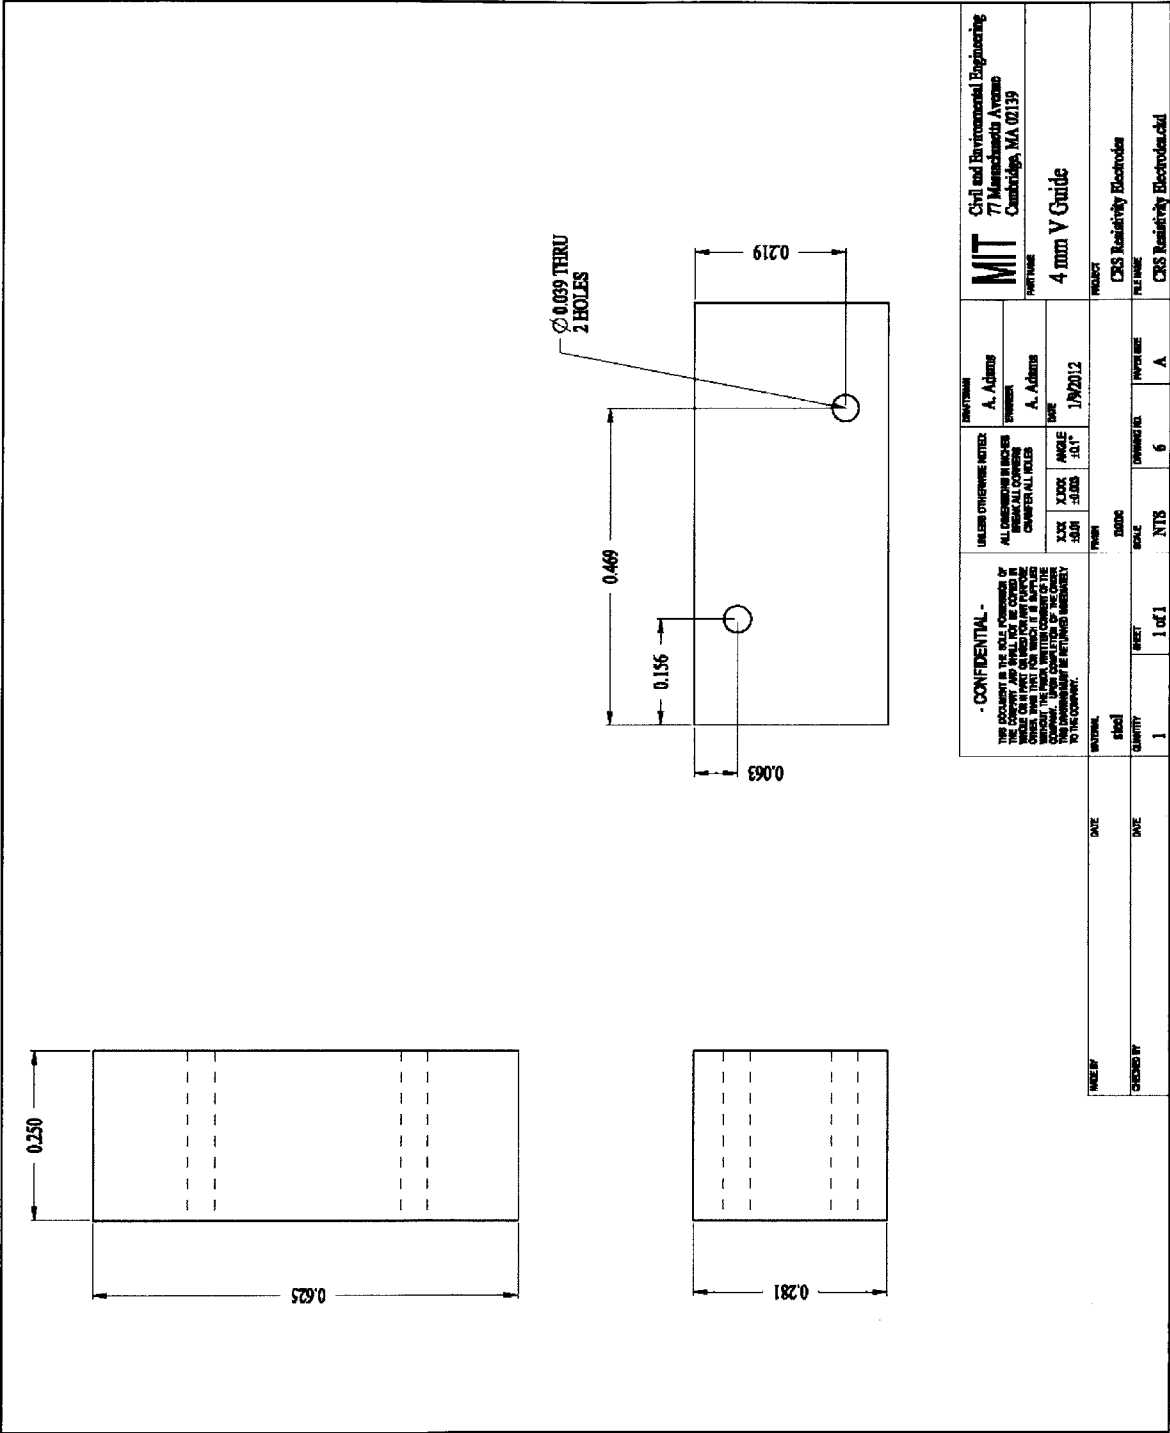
CRS Electrodes: Drawing 6, 4.0 mm drilling guide
